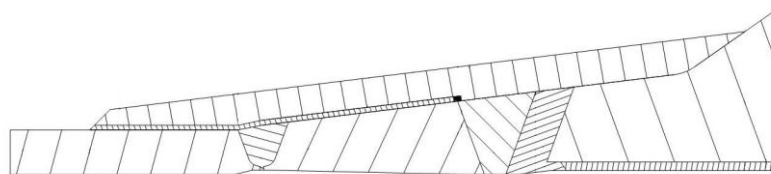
typical pipe to pressurizer weld configuration with SWOL
